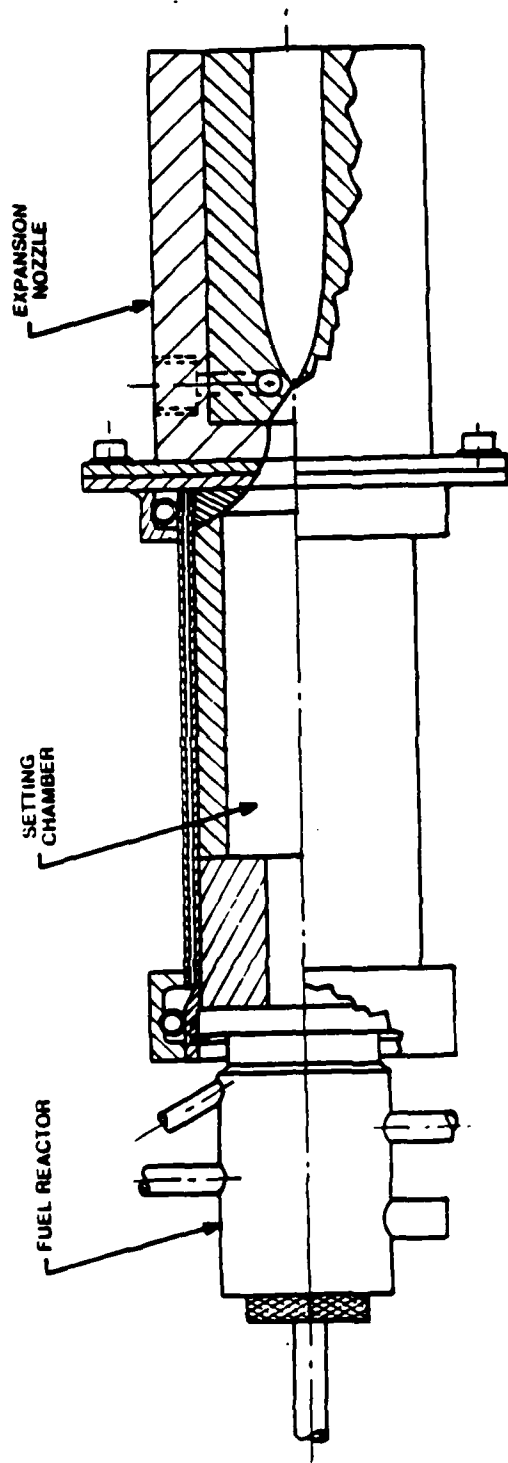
Conceptual Design of the Burner/Combustor/Nozzle Assembly.
